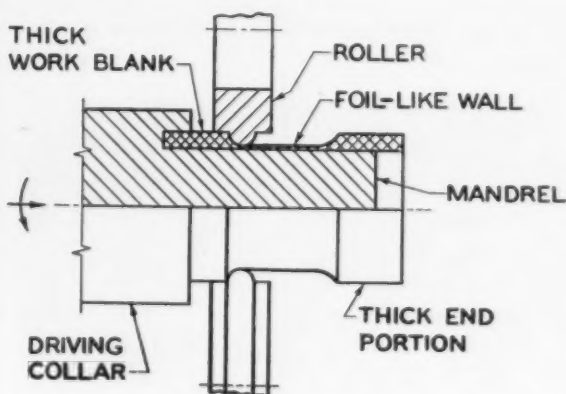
Rotational and axial driving forces transmitted through the work blank force material to flow between the mandrel and the bead on the rollers.
